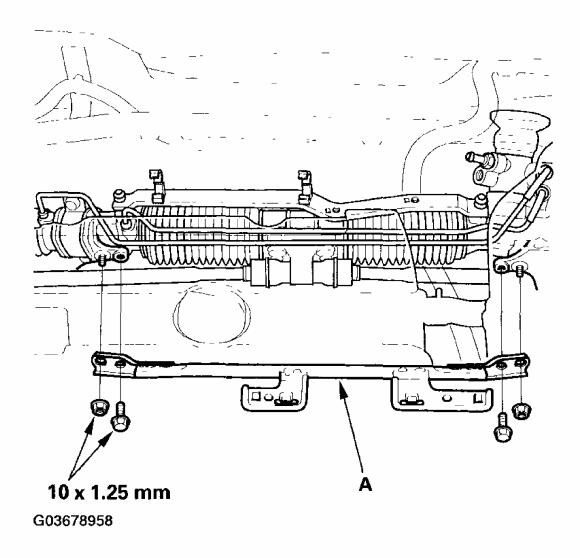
Removing Body Stiffener Courtesy of AMERICAN HONDA MOTOR CO., INC.
